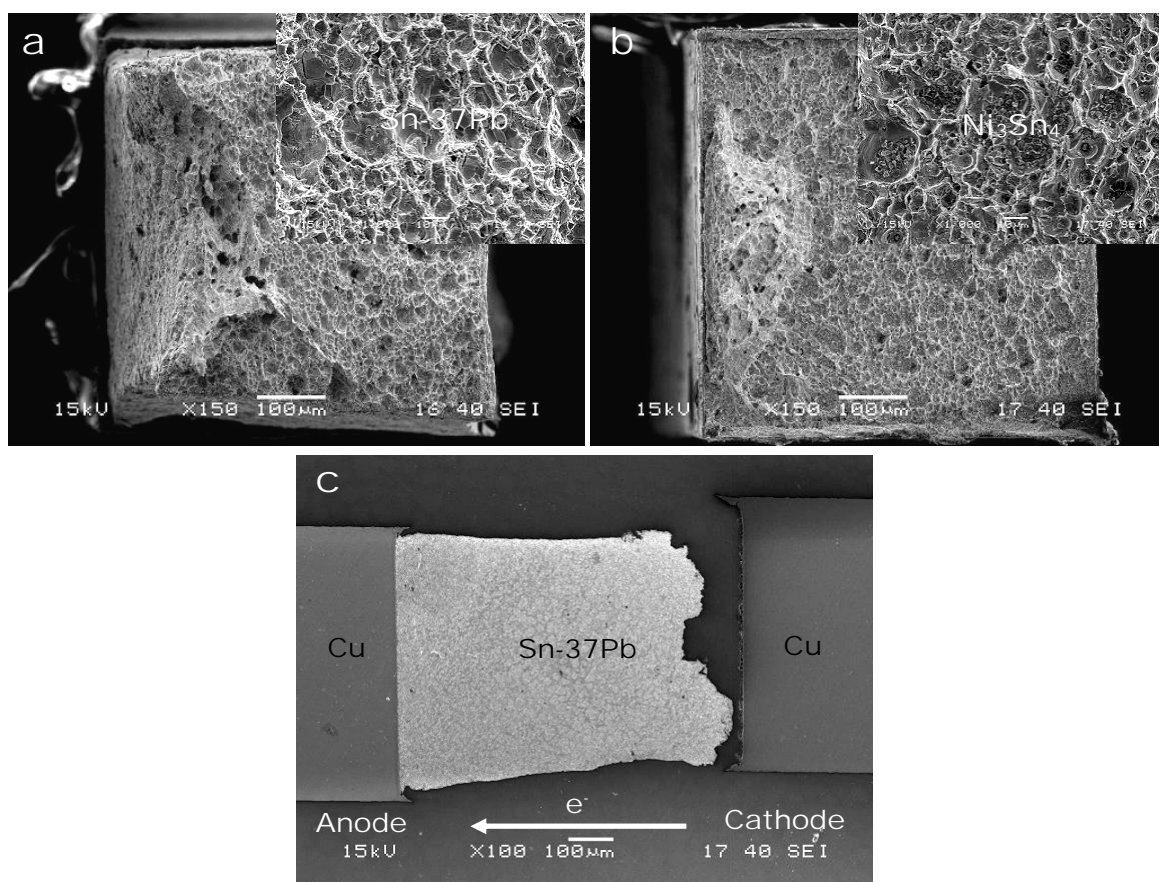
SEM images showing mixed fracture in the electroless Ni-P/Sn-37Pb solder joint aged at 160 °C for 100 h with 3×10^3 A/cm² current density: (a) Anode side top view, (b) cathode side top view, and (c) cross-sectional view.
